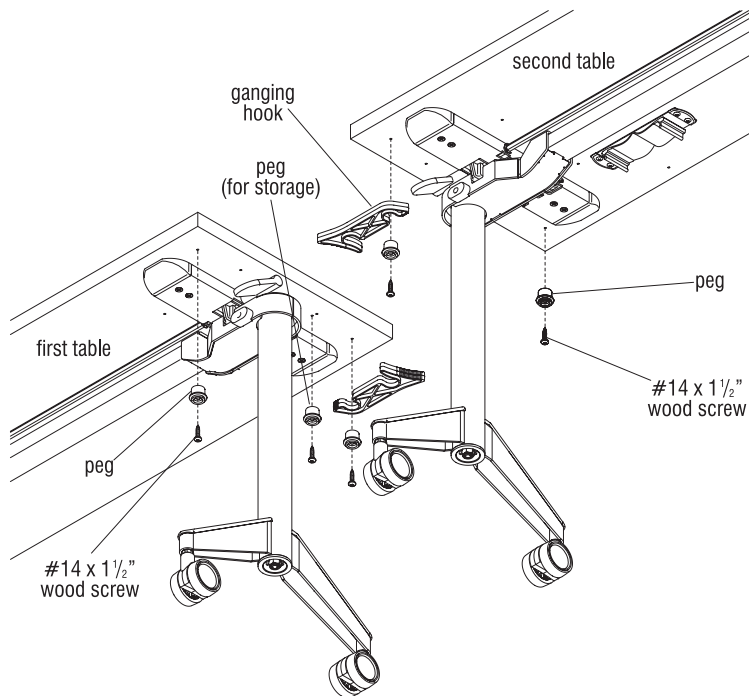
18" Wide Nesting Tables with Side-to-Side Ganging
